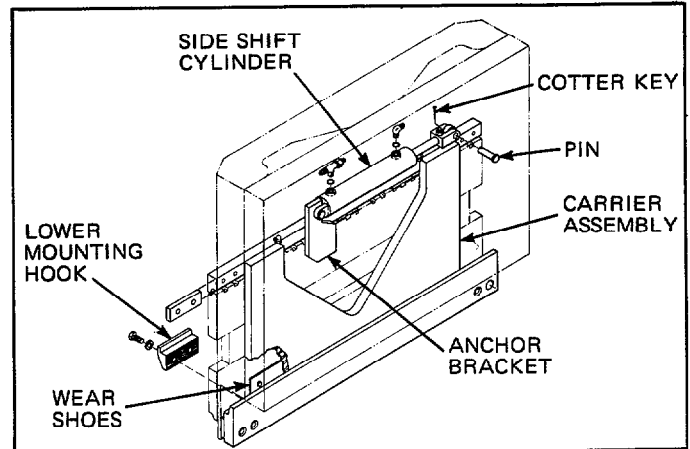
Cylinder, Mounting Hooks, and Wear Shoe Location
